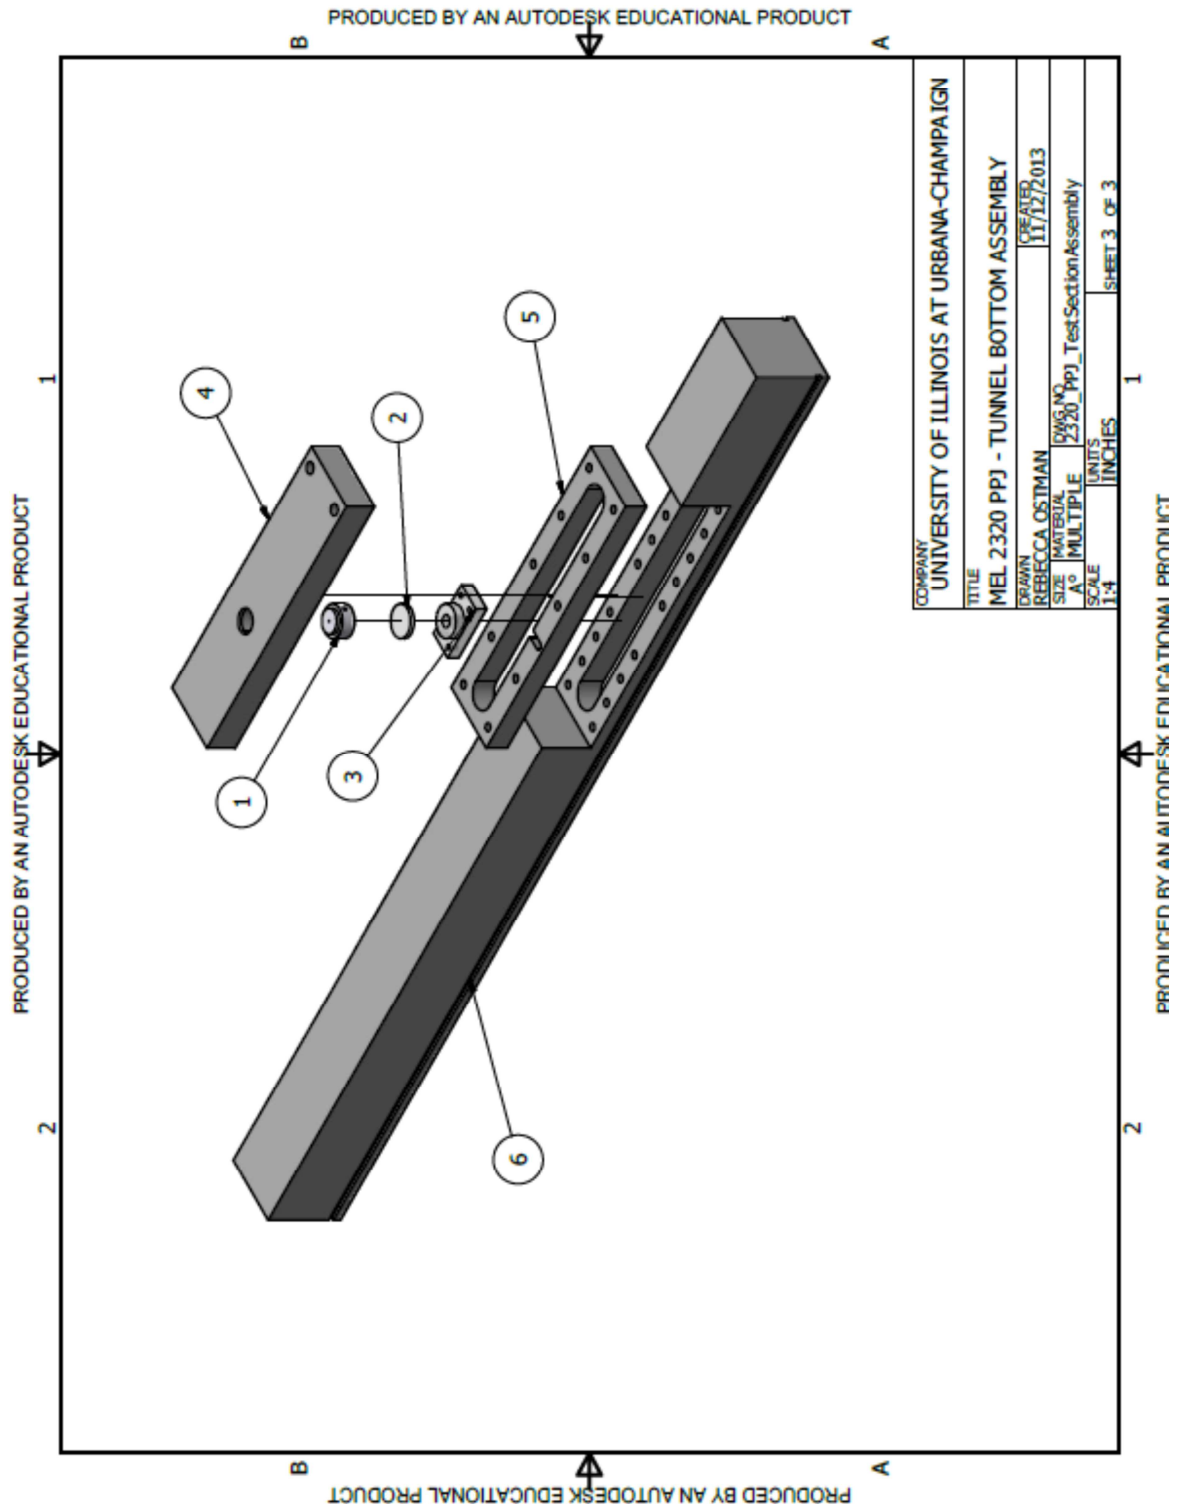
(cont.) c) exploded view of PPJ assembly.
